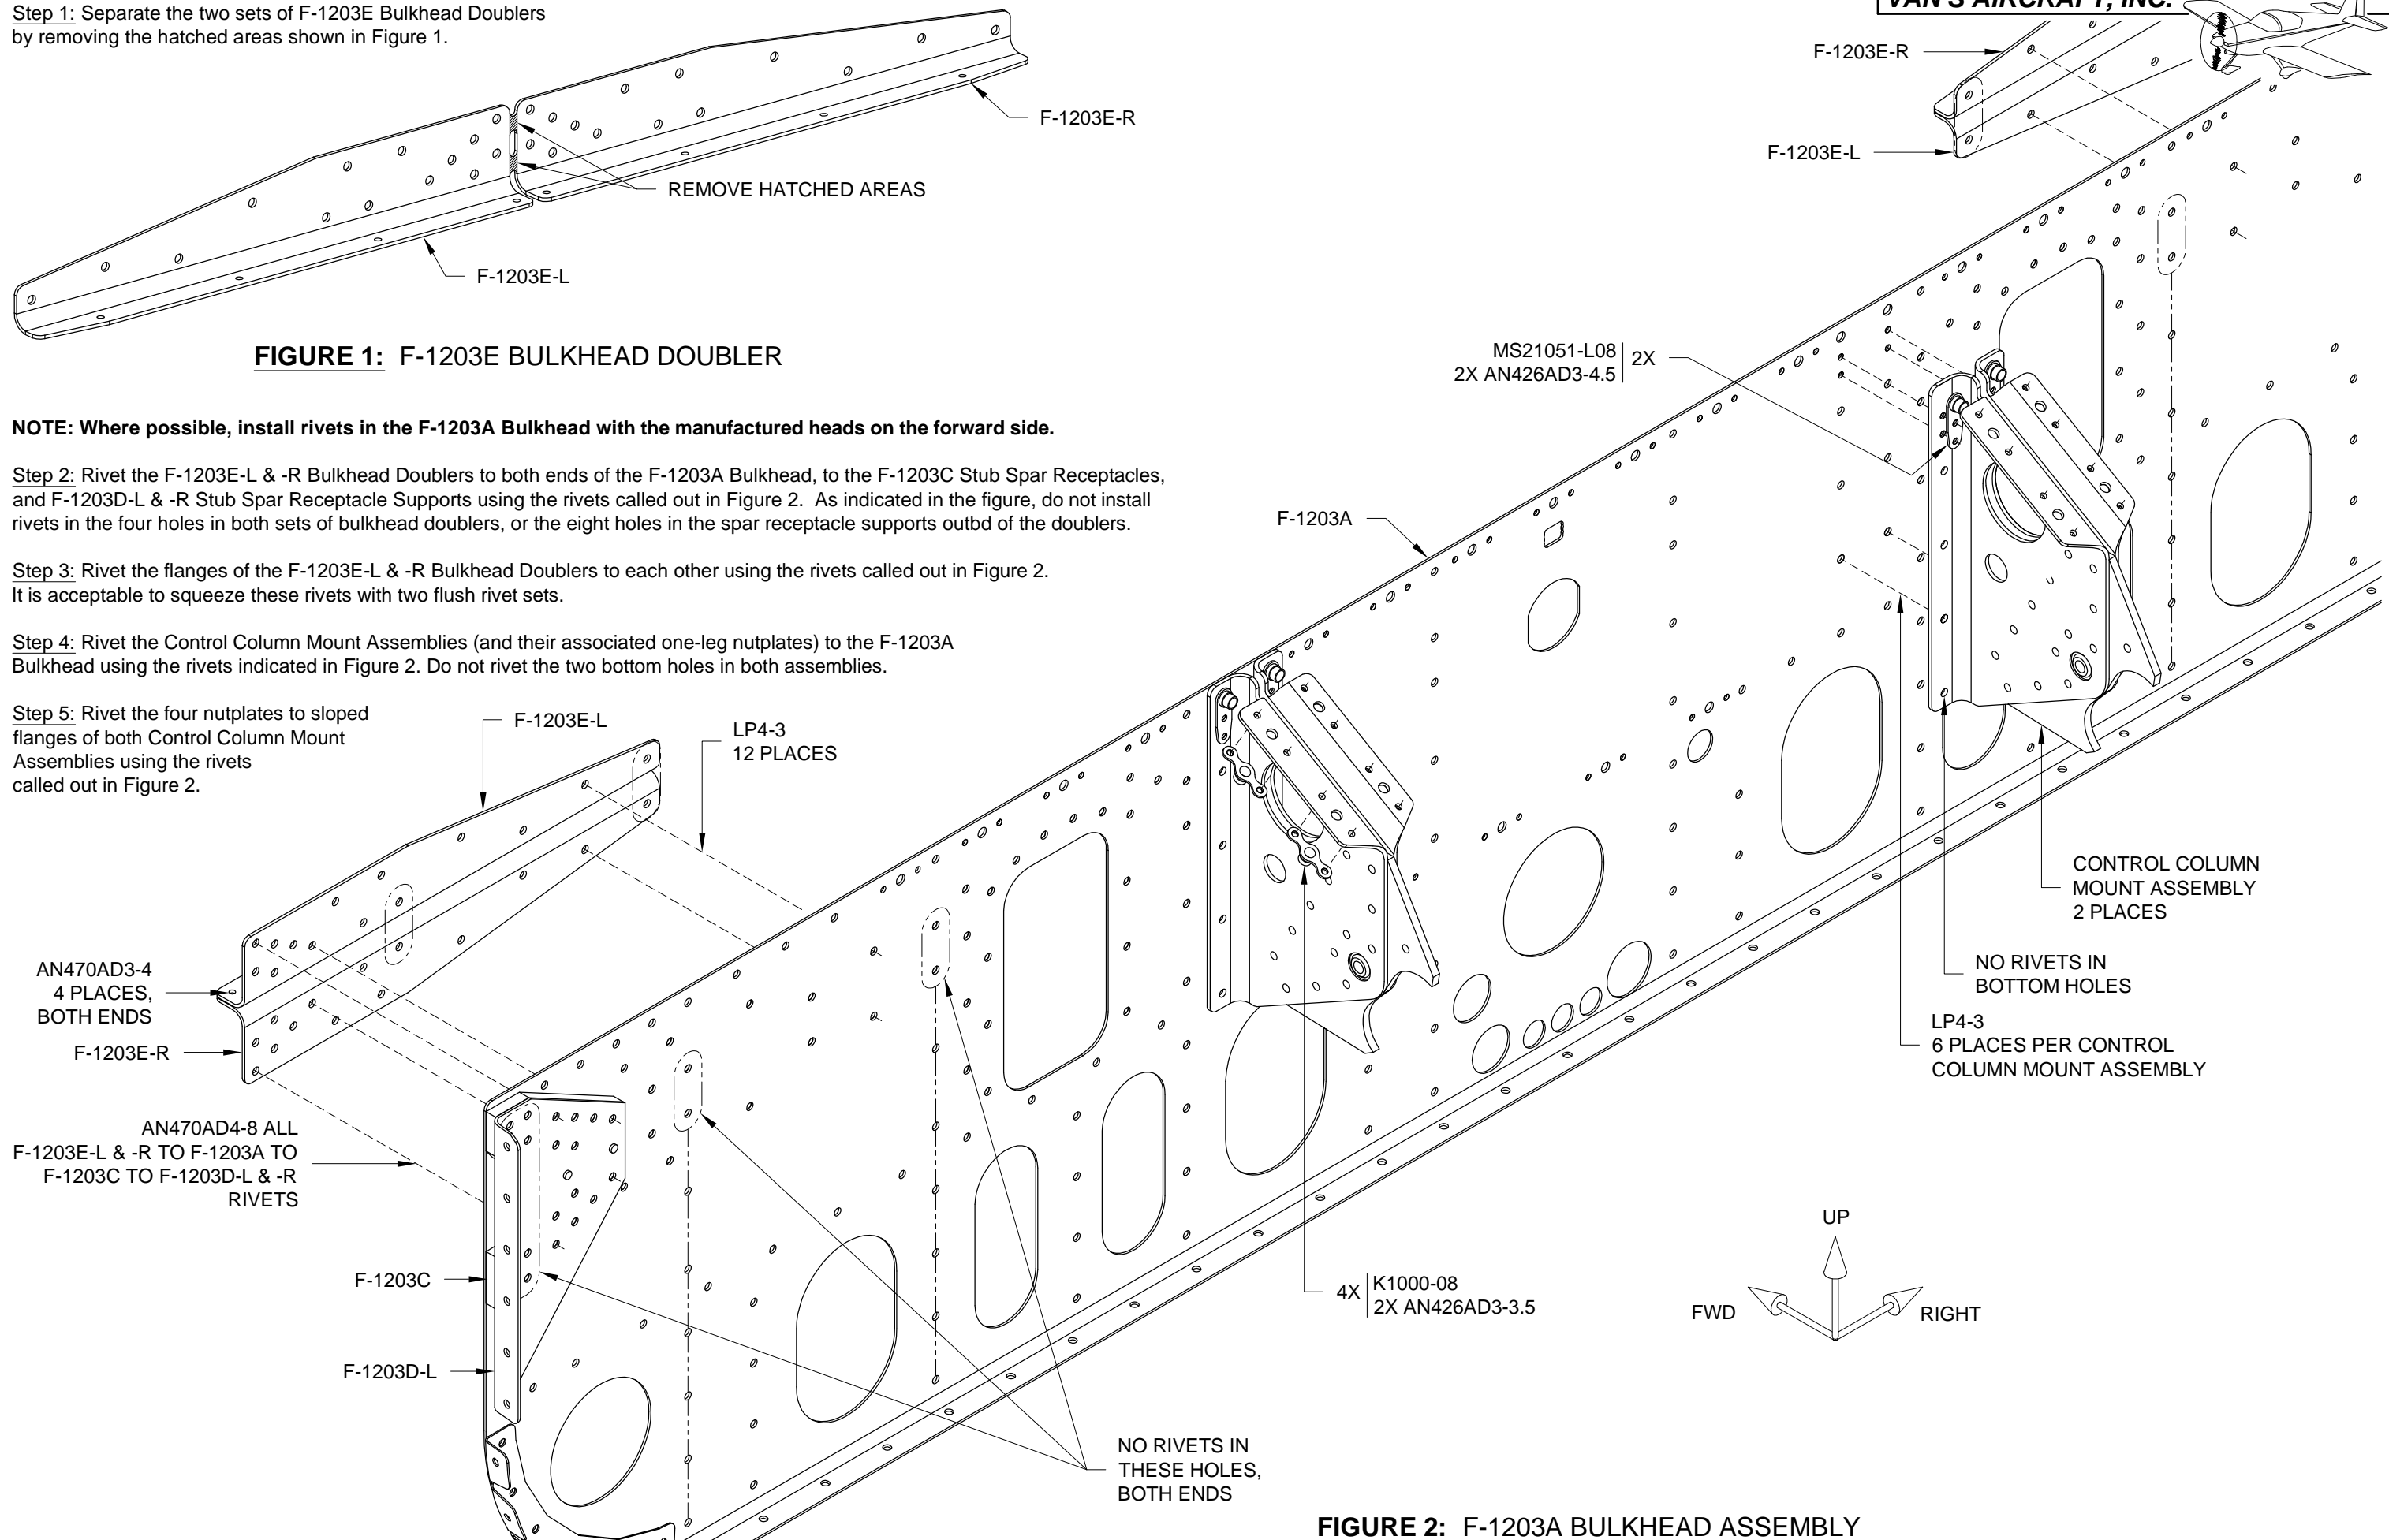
F-1203A BULKHEAD ASSEMBLY
